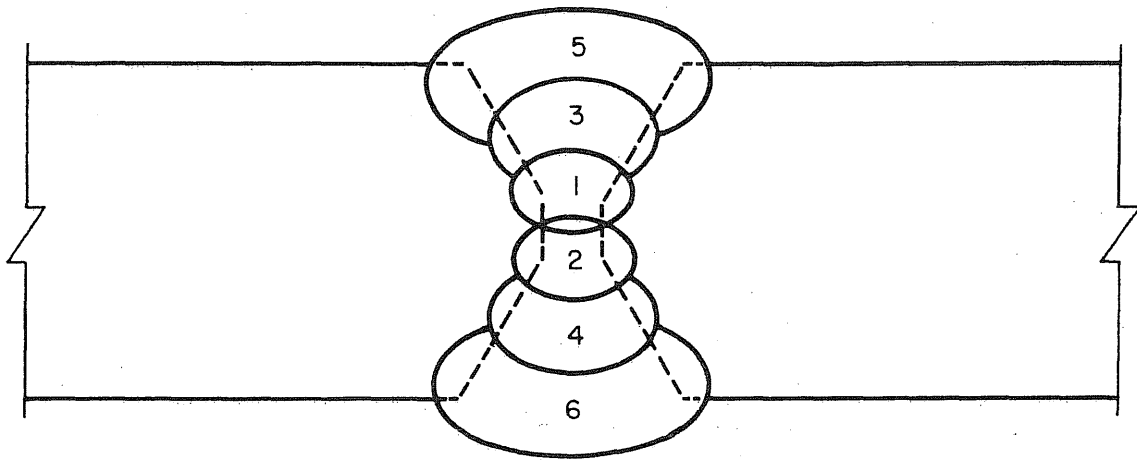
SEQUENCE OF WELD PASSES
